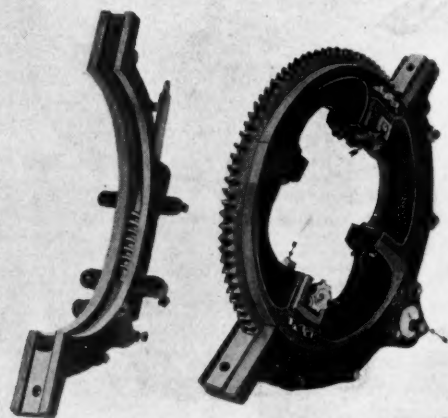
PORTABLE MACHINE WITH HALF OF CASE REMOVED.
